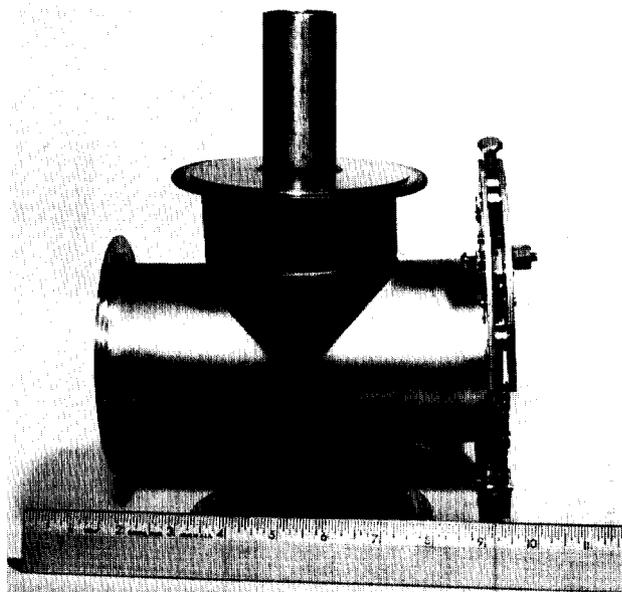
Side view of Fig. 11 cutting tool on 4-in cross.
